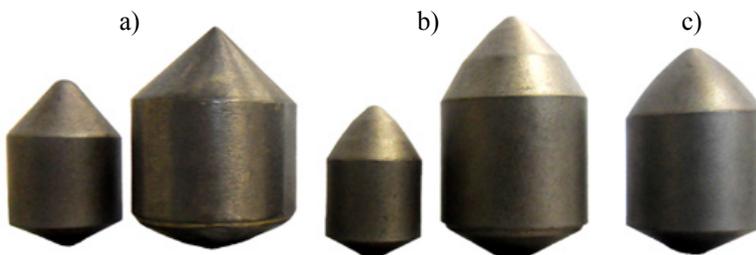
Examples of sintered carbides used for cutting edges of tangential-rotary picks
